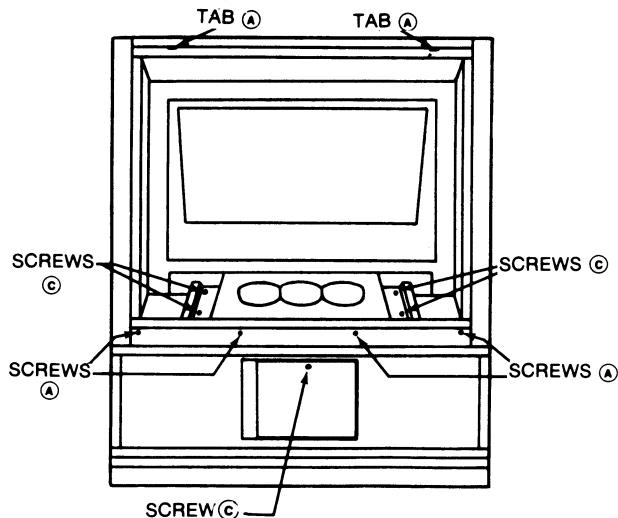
Cabinet Front View (Speaker Grille and Screen Removed) Models: 46GW950, P46100/150, P52150
